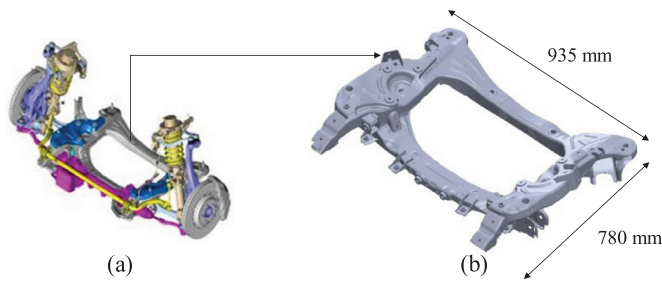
Engine sub-system: (a) assembly of components (b) detail view of steel engine cradle.
